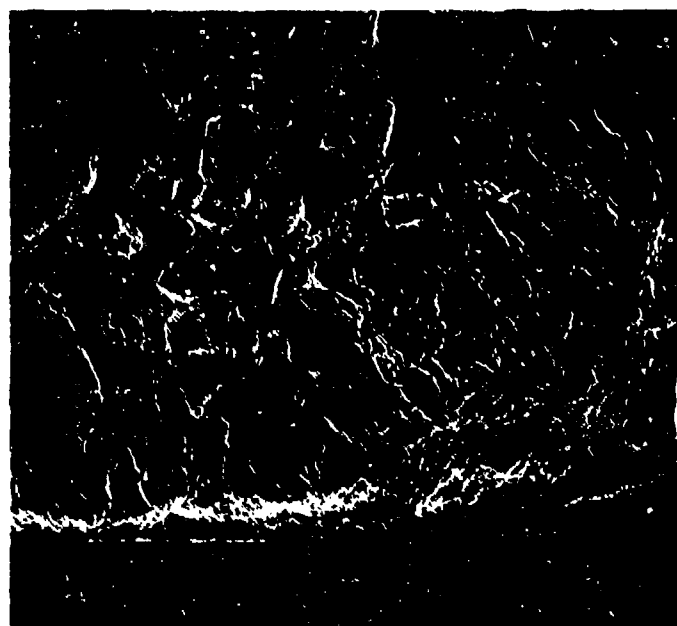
Origin of fatigue failure in a hydrogen-embrittled A-514 weldment containing porosity, 120x.
